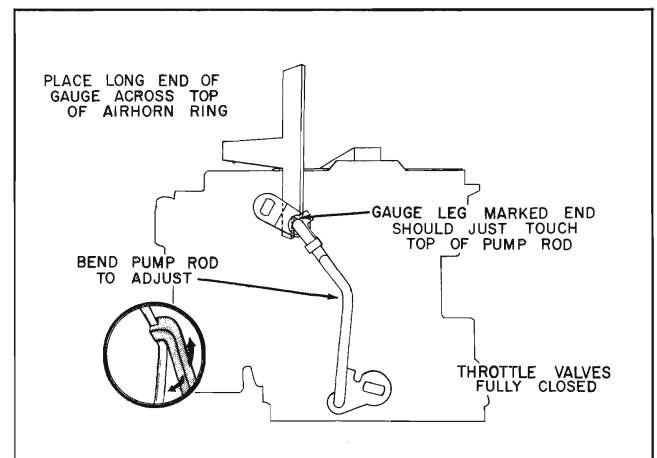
B-50 Pump Rod Adjustment—End Carburetor
